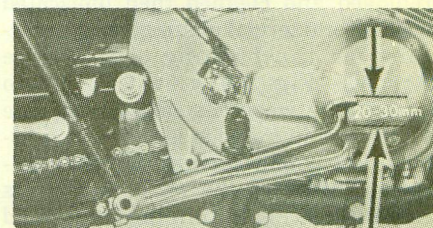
Rear brake pedal should normally lock rear wheel when compressed approximately $\frac{1}{8}$ inch.
